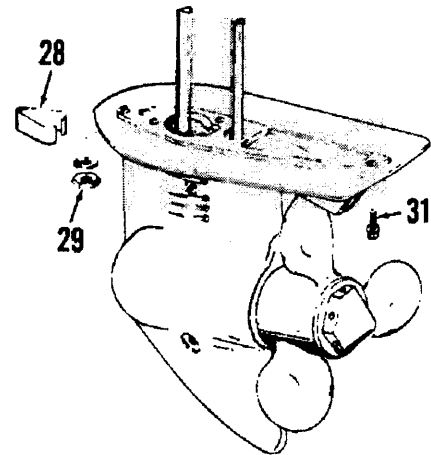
Lower unit gearbox may be removed from motor leg after removal of nut (29) and screw (31). On later models, stud nut (29) is located at front edge of motor leg.
